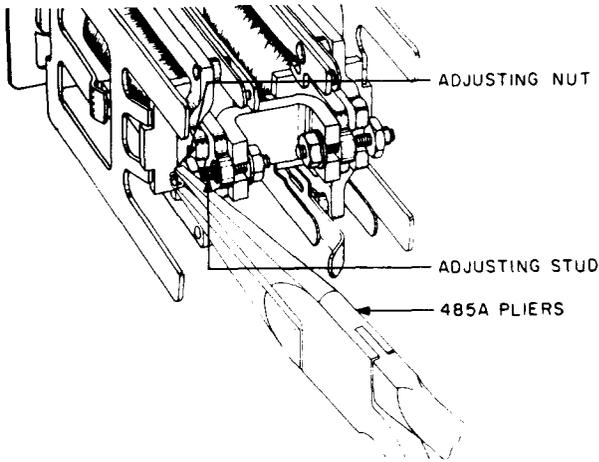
Method of Tightening Adjusting Nut on Stud
